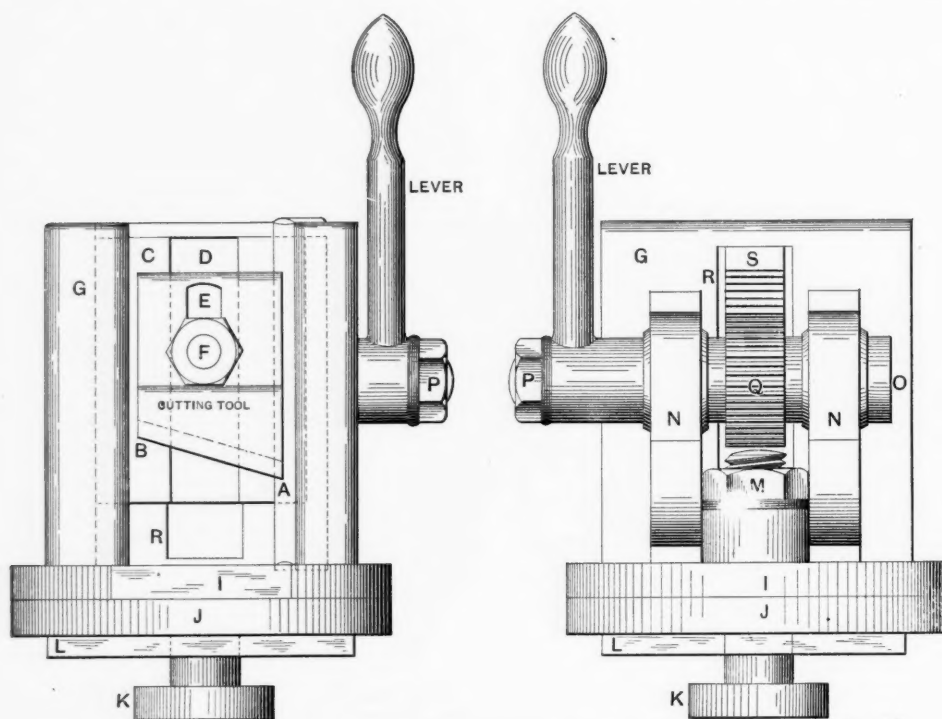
Front and Back Views of Special Turret Lathe Fixture.
